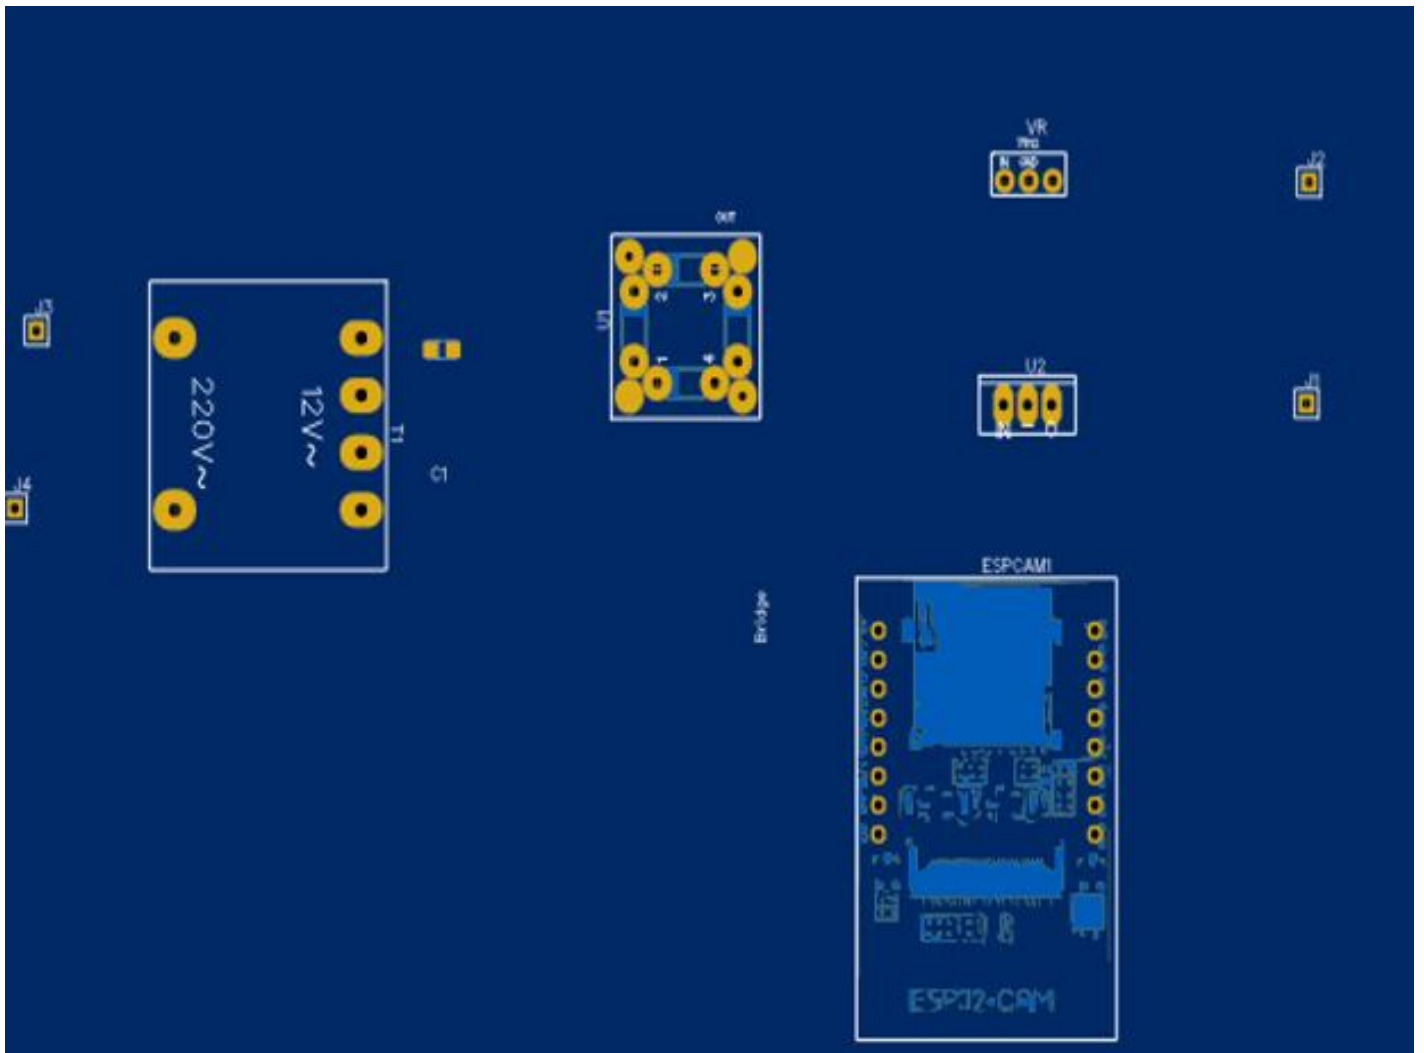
IFRSACS System PCB Design Interface (2D View of the PCB Layout)
